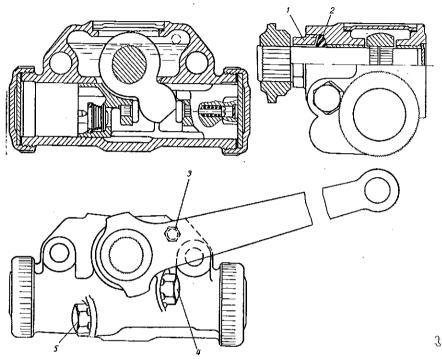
Rear Shock Absorber: t—oil seal nut; 2—oil seal; 3—filler plug; 4—rebound valve plug; 5—compression valve plug
